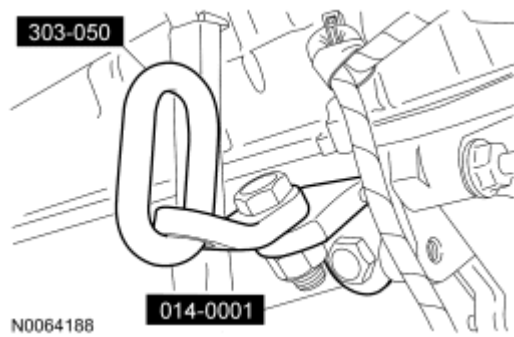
Identifying Special Tools (303-050 And 014-0001)
